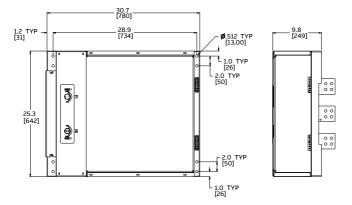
Automatic transfer switch mounting hole dimensions - R5 4-pole
